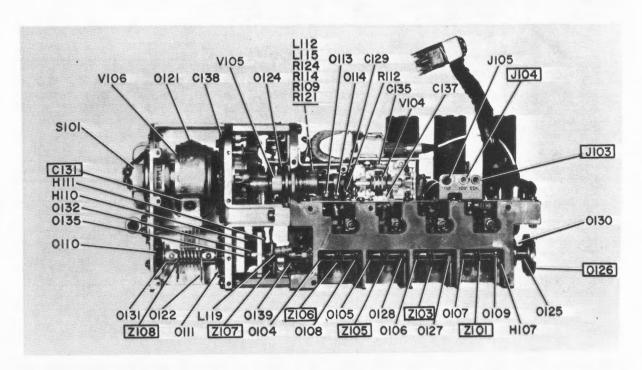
RF and PA Amplifier Assembly, Left Side
